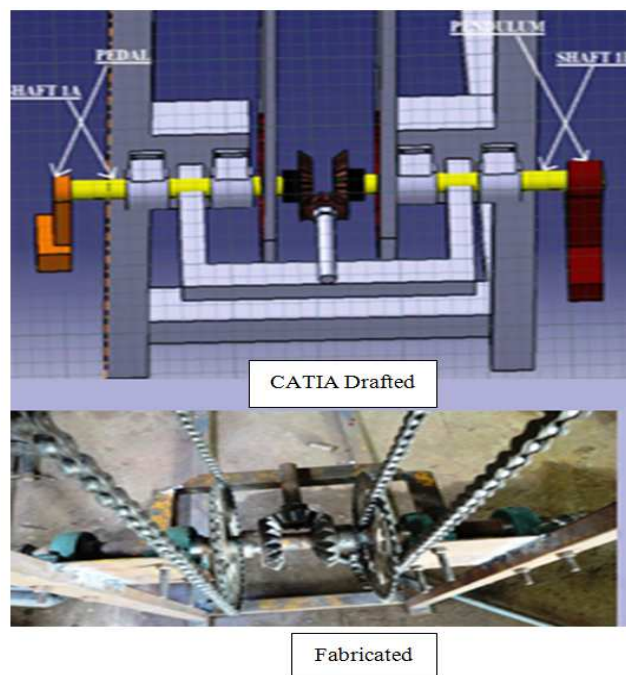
Some of the Parts Fabricated and Used for Assembling the Pump Set
